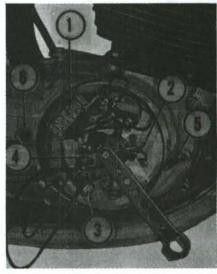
View of right side with cover removed. Refer to text for adjusting the ignition timing.
